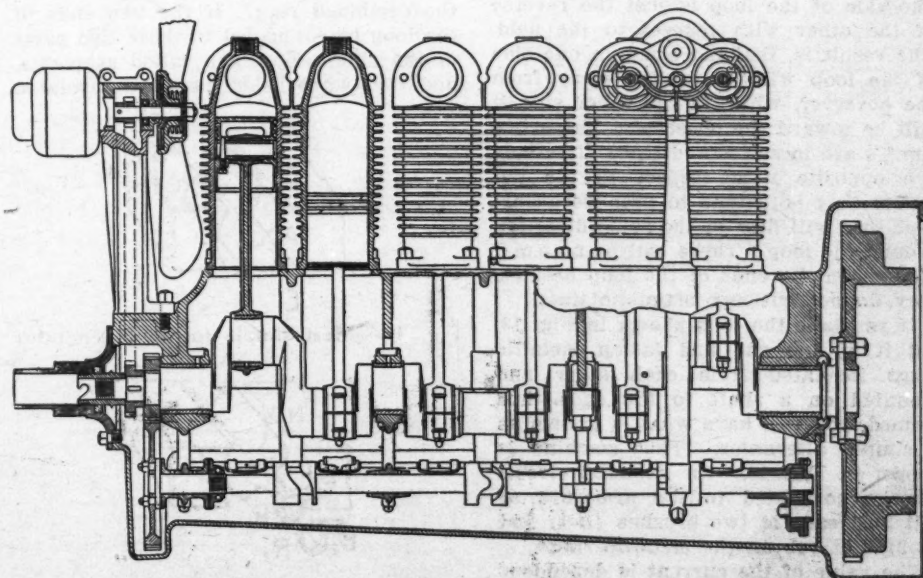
Side view of the 6-cylinder air cooled Cameron engine
